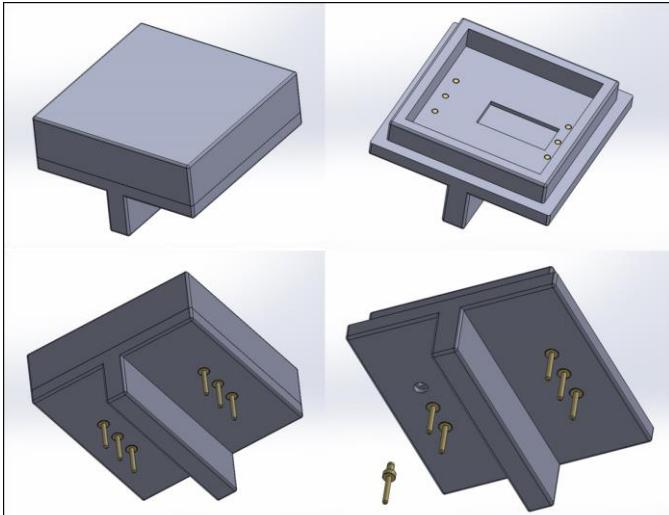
(clockwise from upper left) 3D printed high voltage package, top view; package with lid removed; bottom view showing pin insertion; bottom view fully assembled
